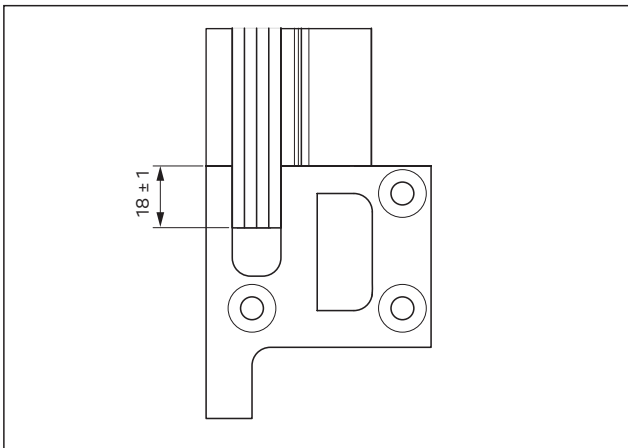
Door frame positioner for floor mounting on the horizontal mounting profile
